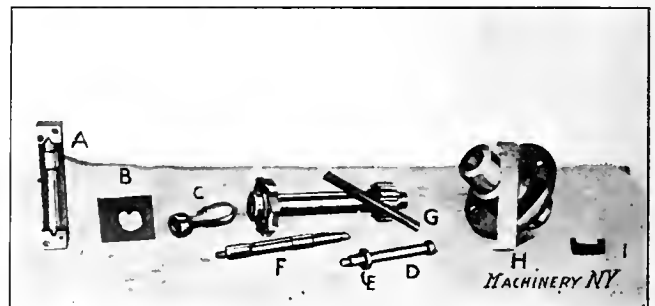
Gages for Testing the Parts of the Device shown in Fig. 5
